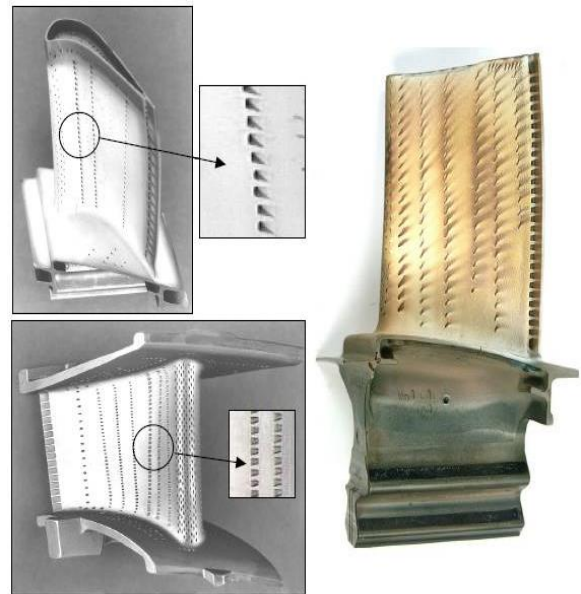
Rotor and stator HPT blades with film cooling of the airfoil
